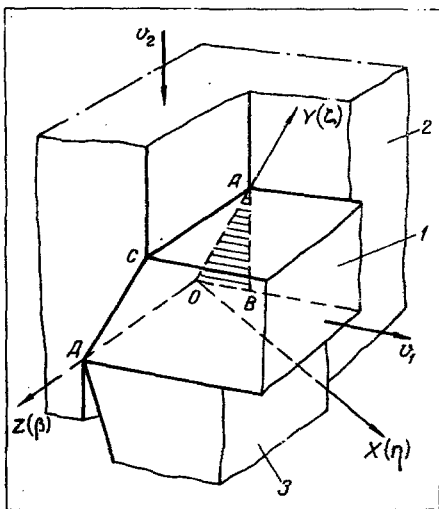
Schematic diagram of a constrained machining operation: 1) chip; 2) workpiece; 3) tool.
